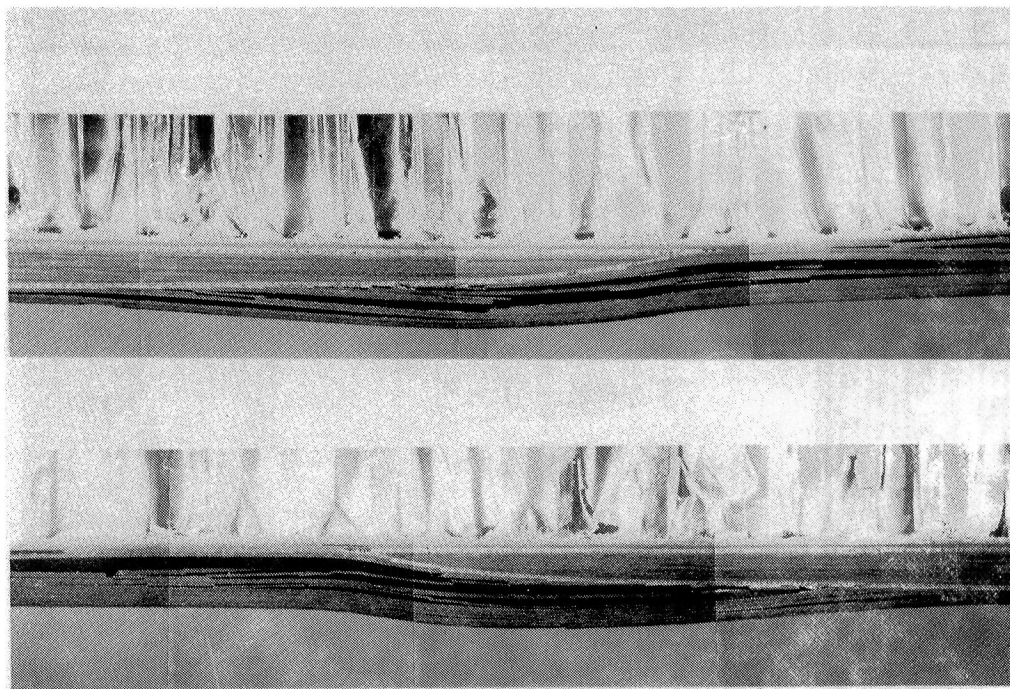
Type I specimen after test showing poorly machined scarf taper.
